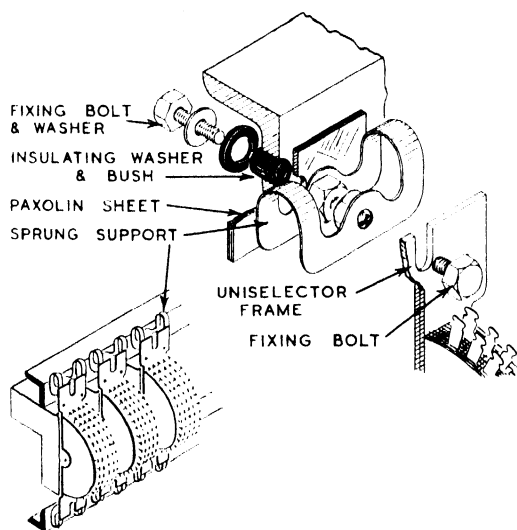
SPRING CLIP MOUNTING FOR UNISELECTORS
